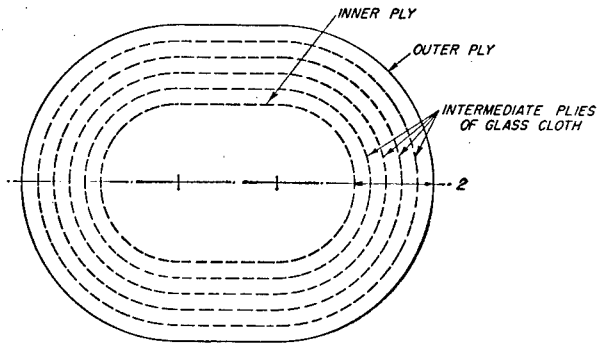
Oval patch assembly used in parts faced with glass cloth when both sides are accessible.
